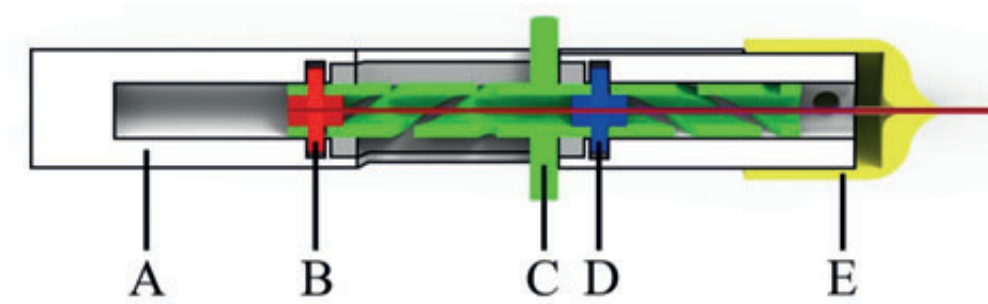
Handle Design of the Biopsy Needle. The handle of the biopsy needle consists of: A: outer shell, B: rotational bearing connected to the inner cutting blade, C: helical tube, D: rotational bearing connected to the outer cutting blade, and E: cap connected to the cannula to shield the blades during insertion and retraction.
